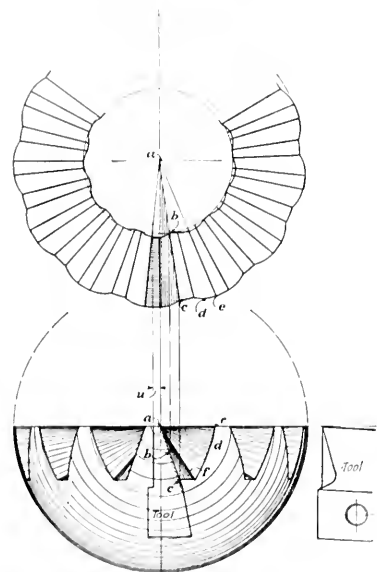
GENERATOR TOOL REPLACING ONE SIDE OF THE MOLDING TOOTH
